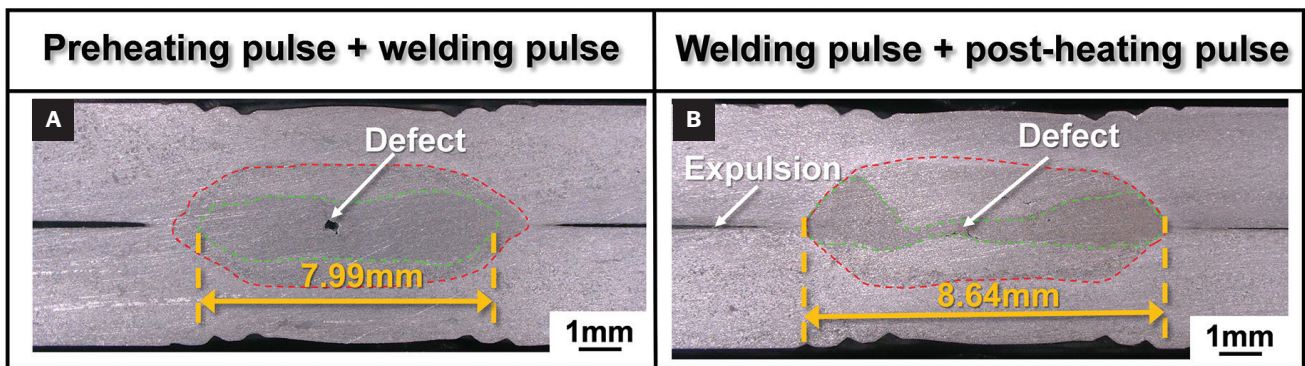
A – Preheating pulse + welding pulse; B – welding pulse + postheating pulse.
